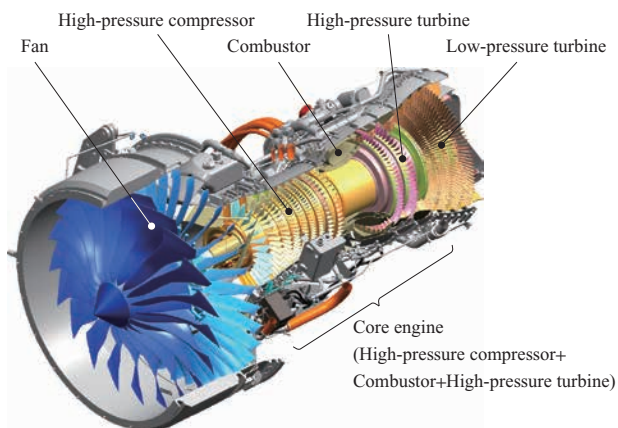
Turbofan engine (Cutaway model of ECO-engine)
